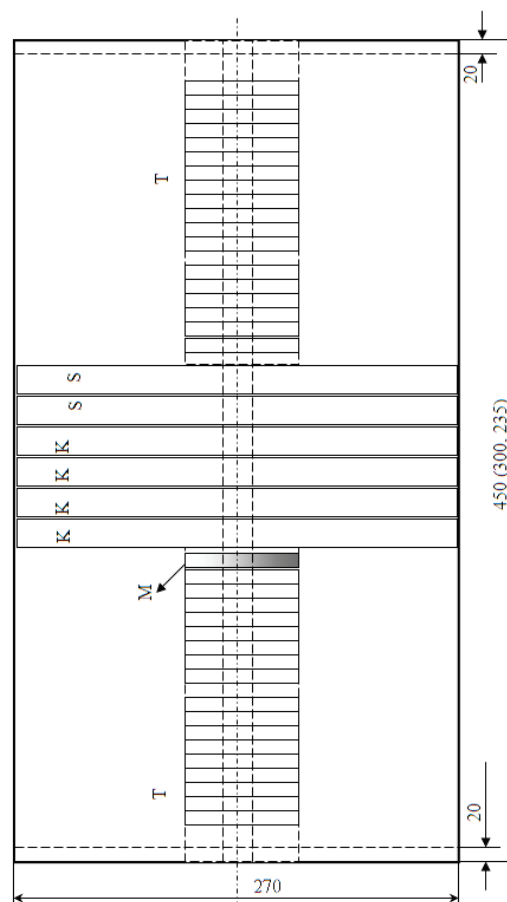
Sketch of cutting specimens for mechanical testing of base metal and welded joints
